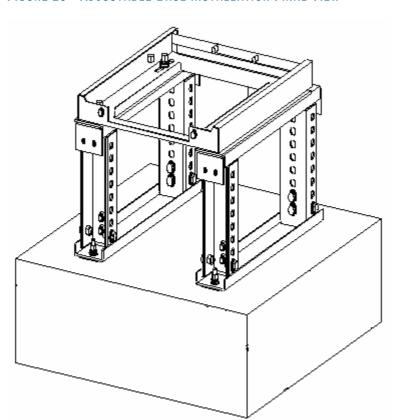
ADJUSTABLE BASE INSTALLATION FINAL VIEW
